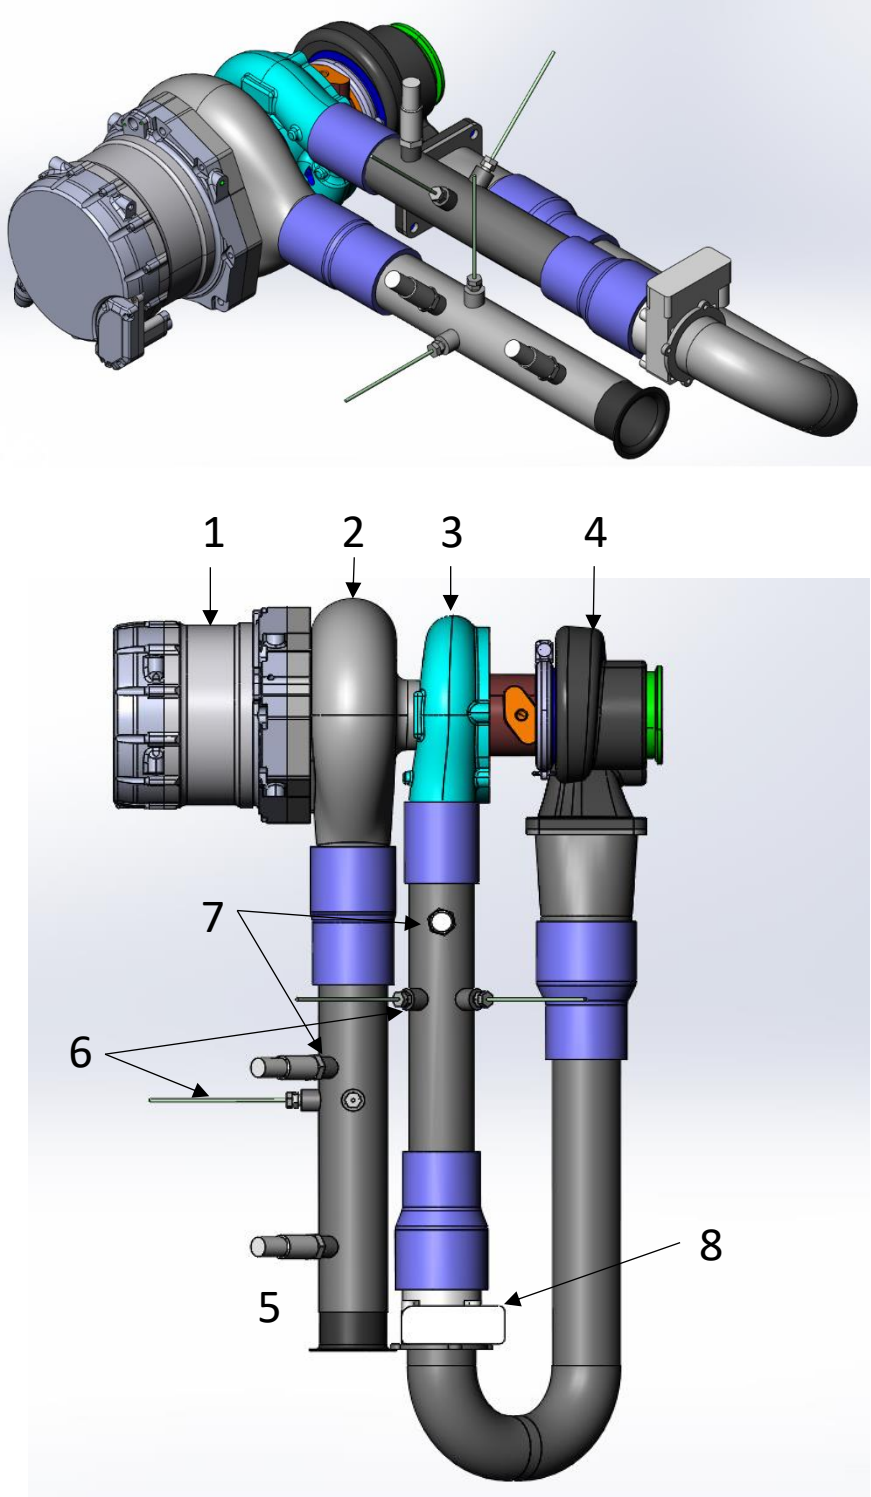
1 ELECTRIC MOTOR, 2 COMPRESSOR INLET COVER, 3 COMPRESSOR, 4 TURBINE, 5 FLOW MEASUREMENT SECTION, 6 TEMPERATURE MEASUREMENT SECTIONS, 7 PRESSURE MEASUREMENT SECTIONS, 8 VALVE SECTION.
